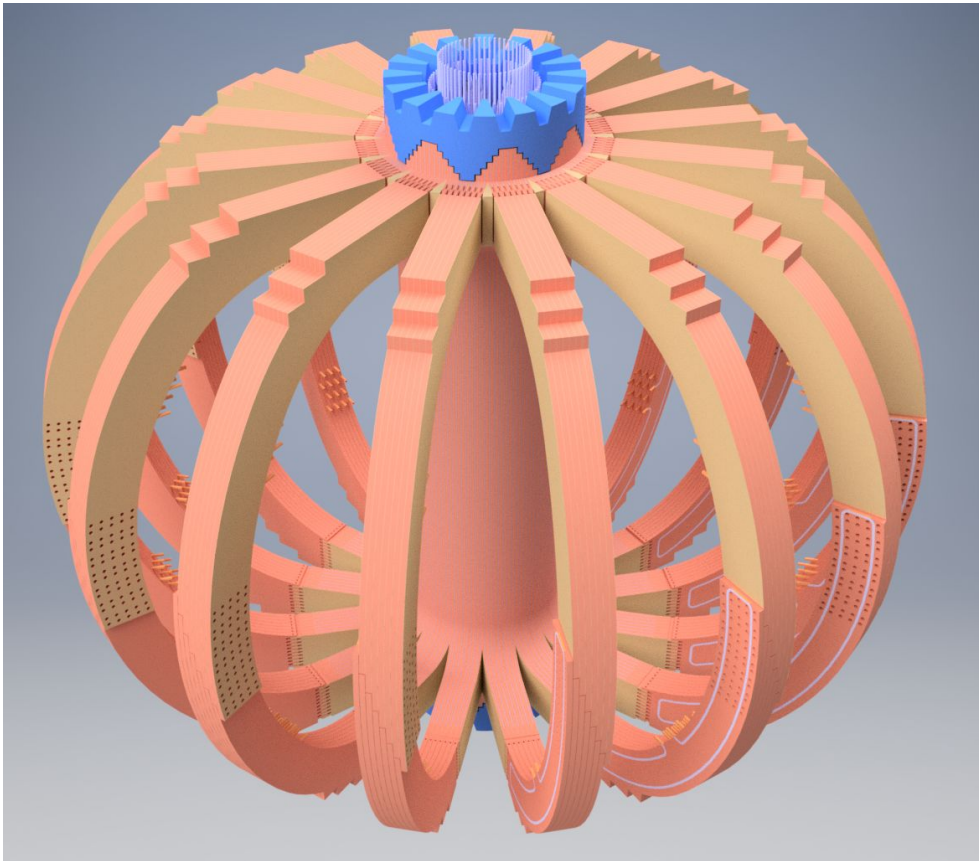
Toroidal field coil assembly. Diameter ~ 3.5 meters, height ~ 2.5 meters
